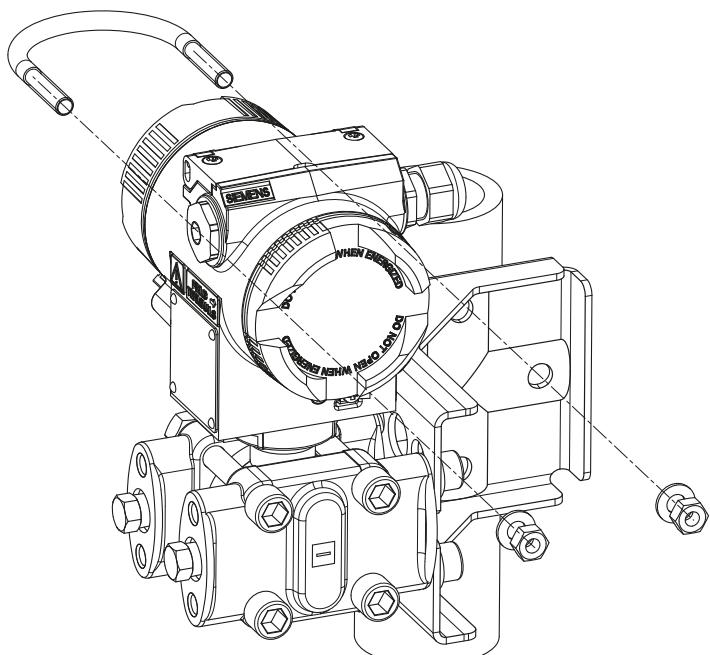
An example of fastening the transmitter on the mounting bracket in the case of differential pressure and horizontal differential pressure lines
